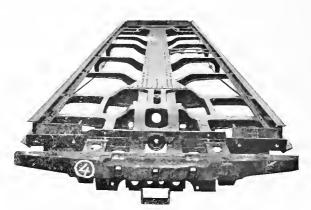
Composite Cast and Structural Steel Underframe for Passenger Cars. Harlan & Hollingsworth.
